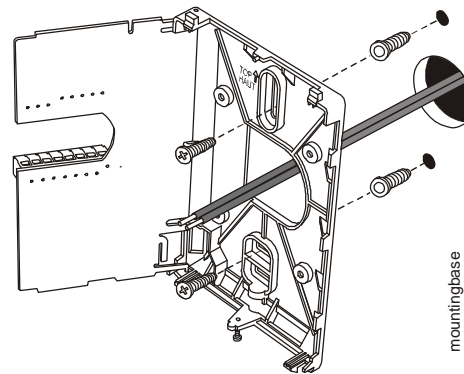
Securing the Thermostat Controller Mounting Base to the Wall
